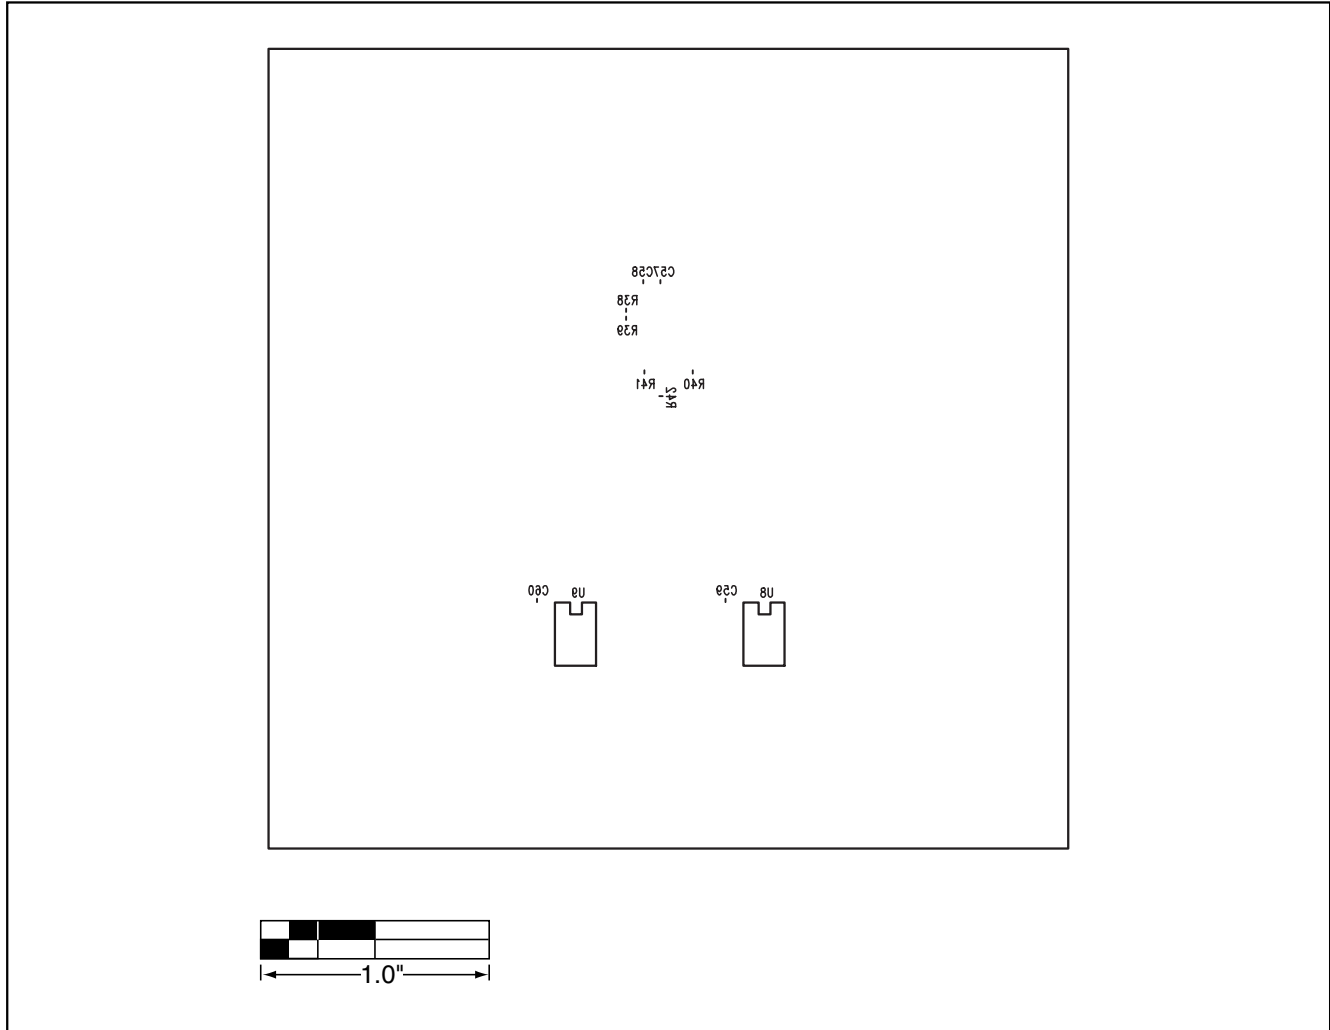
MAX2825/MAX2826/MAX2827 EV Kit PC Board Layout—Bottom Silkscreen
